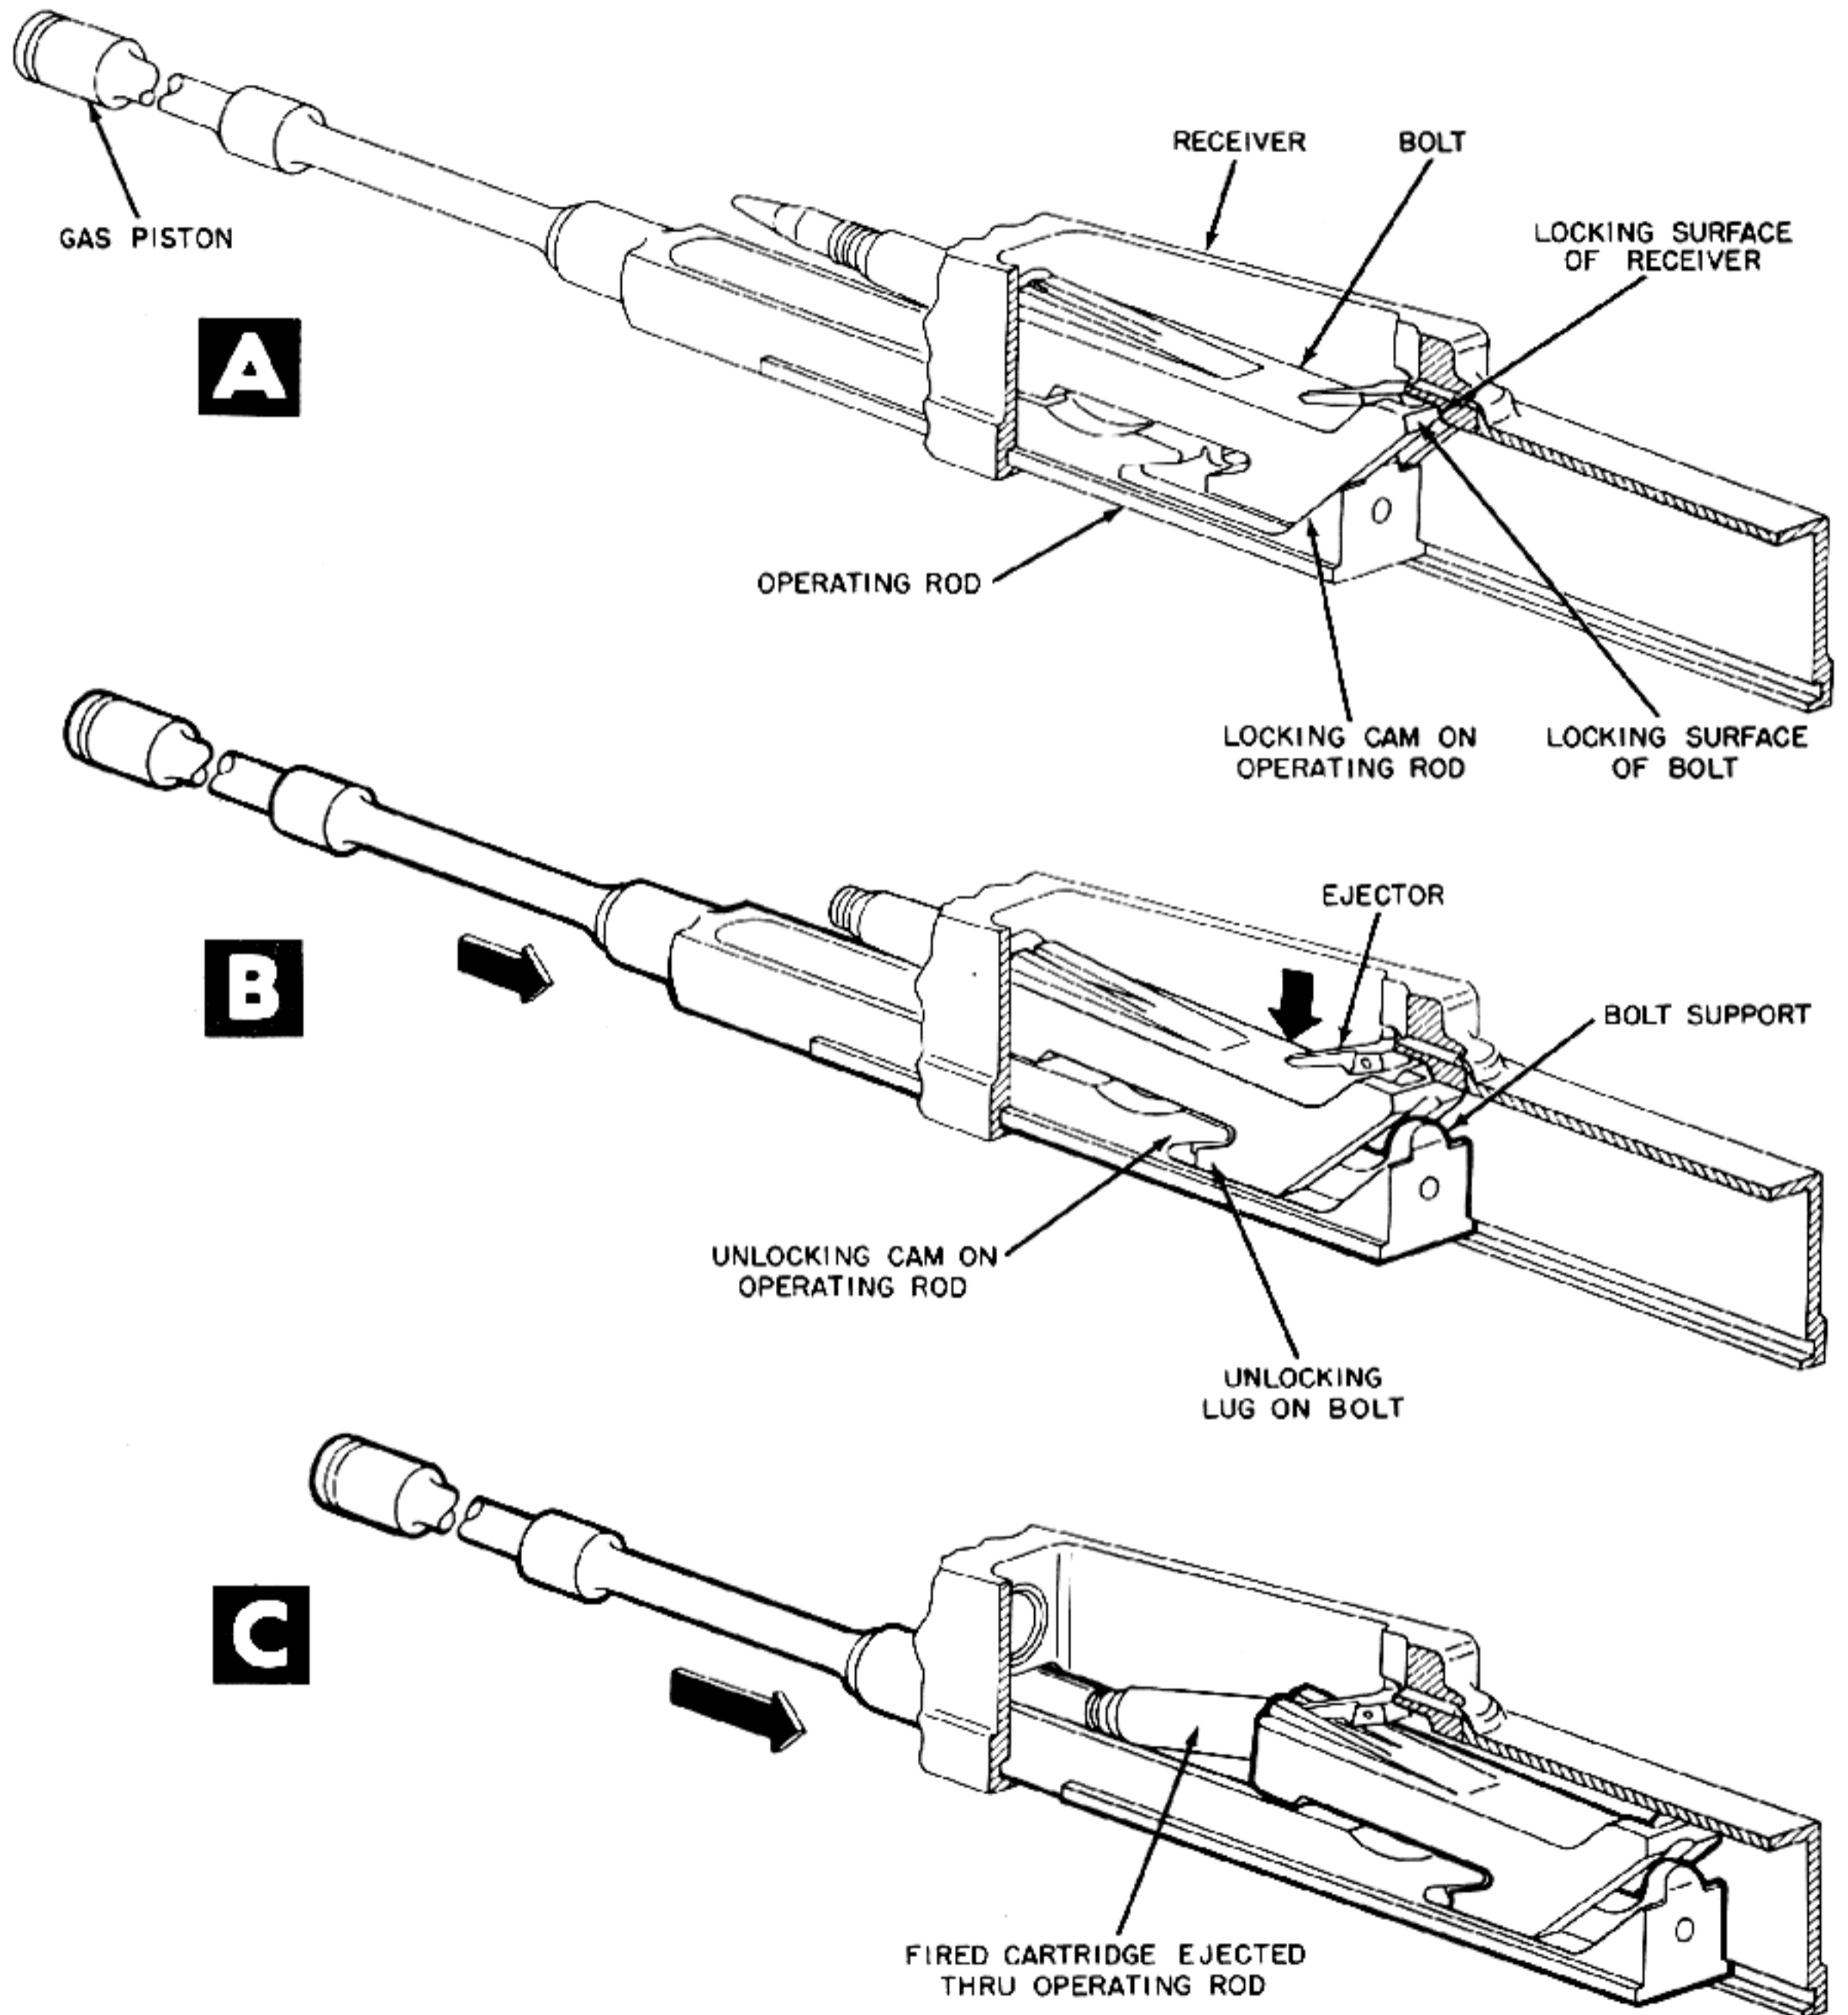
Cam on Operating Rod Pulls Bolt Free of Locking Surface After Withdrawing Bolt Support.
